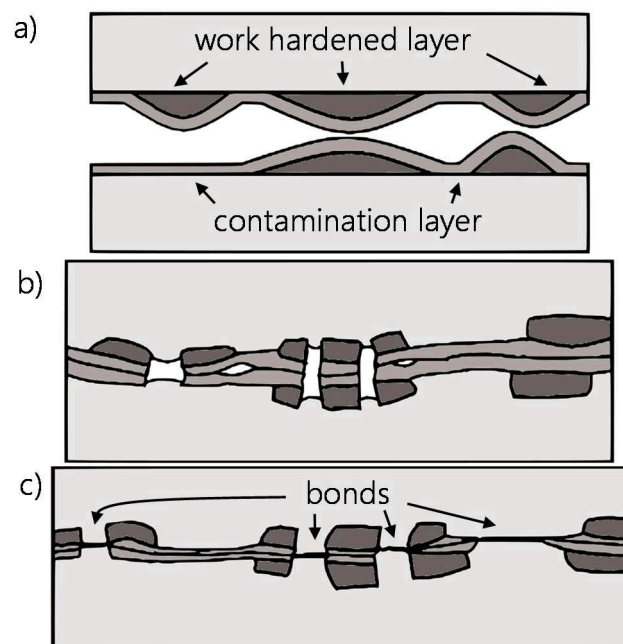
Model for bonding mechanisms during cold welding. a) Scratch brushed surface with a work hardened cover layer and a contaminant film. b) Extrusion of virgin materials through cracks in the cover layer. c) Bonding. Adapted from (Bay1983)
